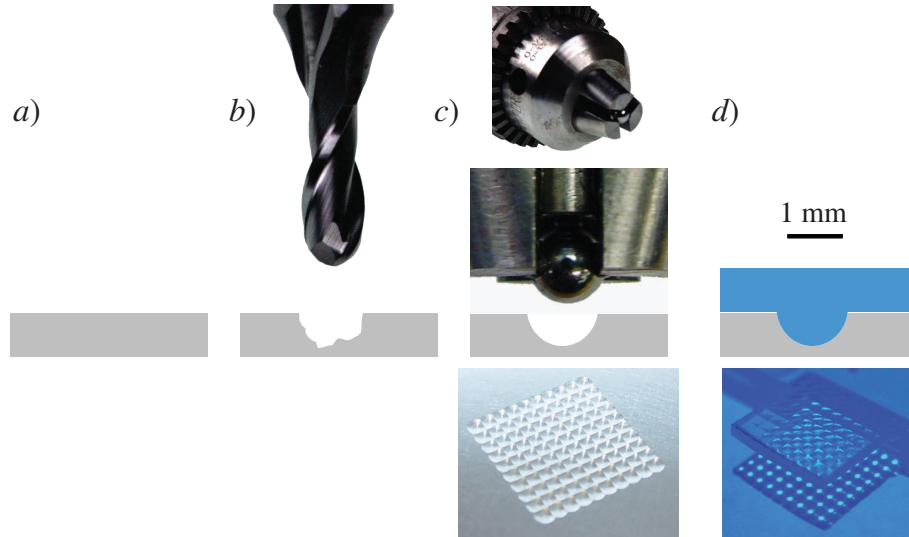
Schematic of lens array mold manufacturing process and photographs of 100 lens array mold and molded part. (a) A blank aluminum mold is faced and polished. (b) A rotating ball-end mill is used to cut an array of divots. (c) A tungsten-carbide sphere is lowered onto the surface to deform the divots to the final shape. (d) The mold is used to injection mold lens arrays, as we have done for arrays containing up to 10,000 lenses.
